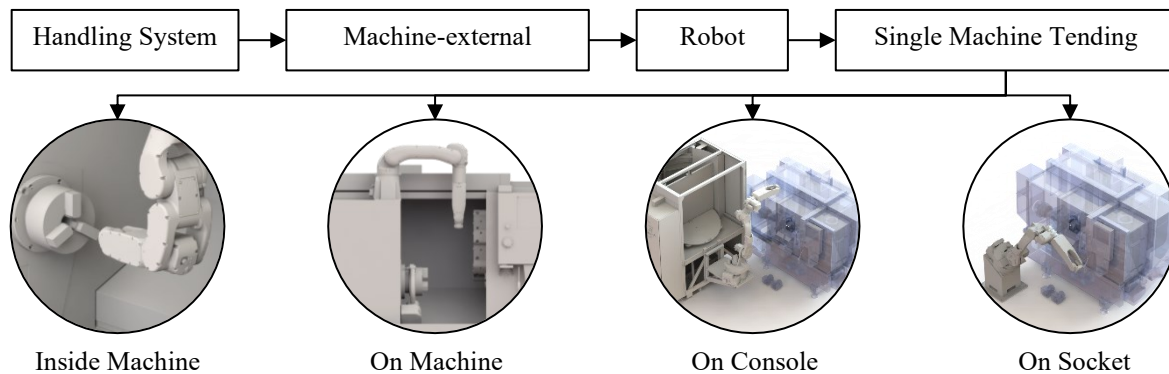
Robot Subsystem - Single Machine Tending Installation Possibilities
